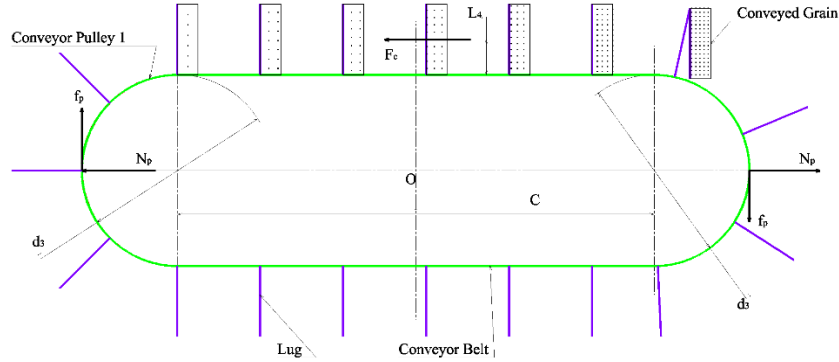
Free Body Diagram of Flat Belt and Lug Assembly
